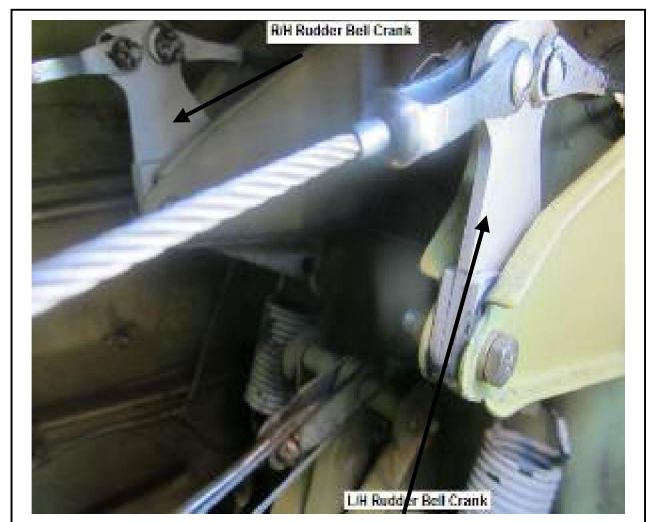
& 5 Example of access panel and bell crank installation in a similar type of aircraft
